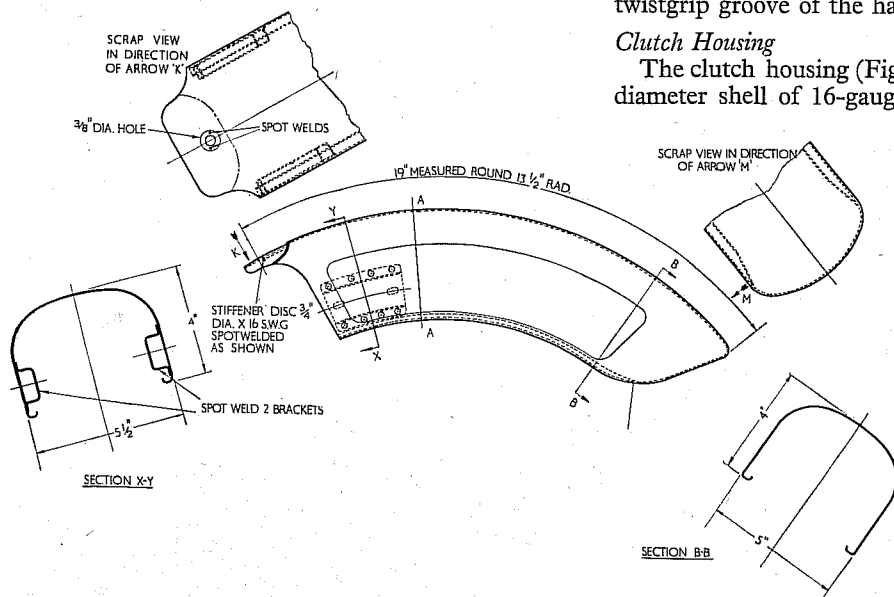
Dimensioned drawing of front mudguard (leading section). (E.N.2A, 22-gauge)
